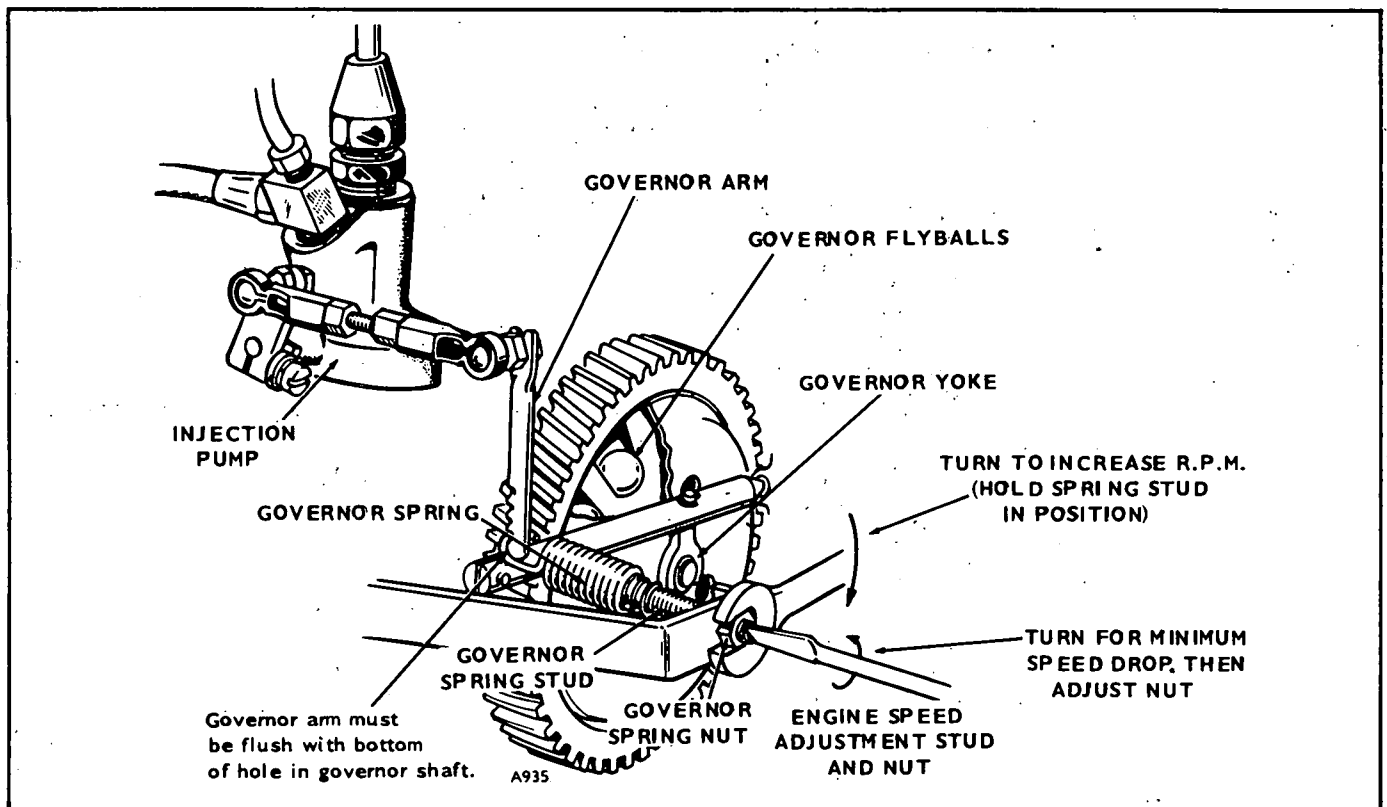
GOVERNOR ASSEMBLY (PRIOR TO SPEC R)
